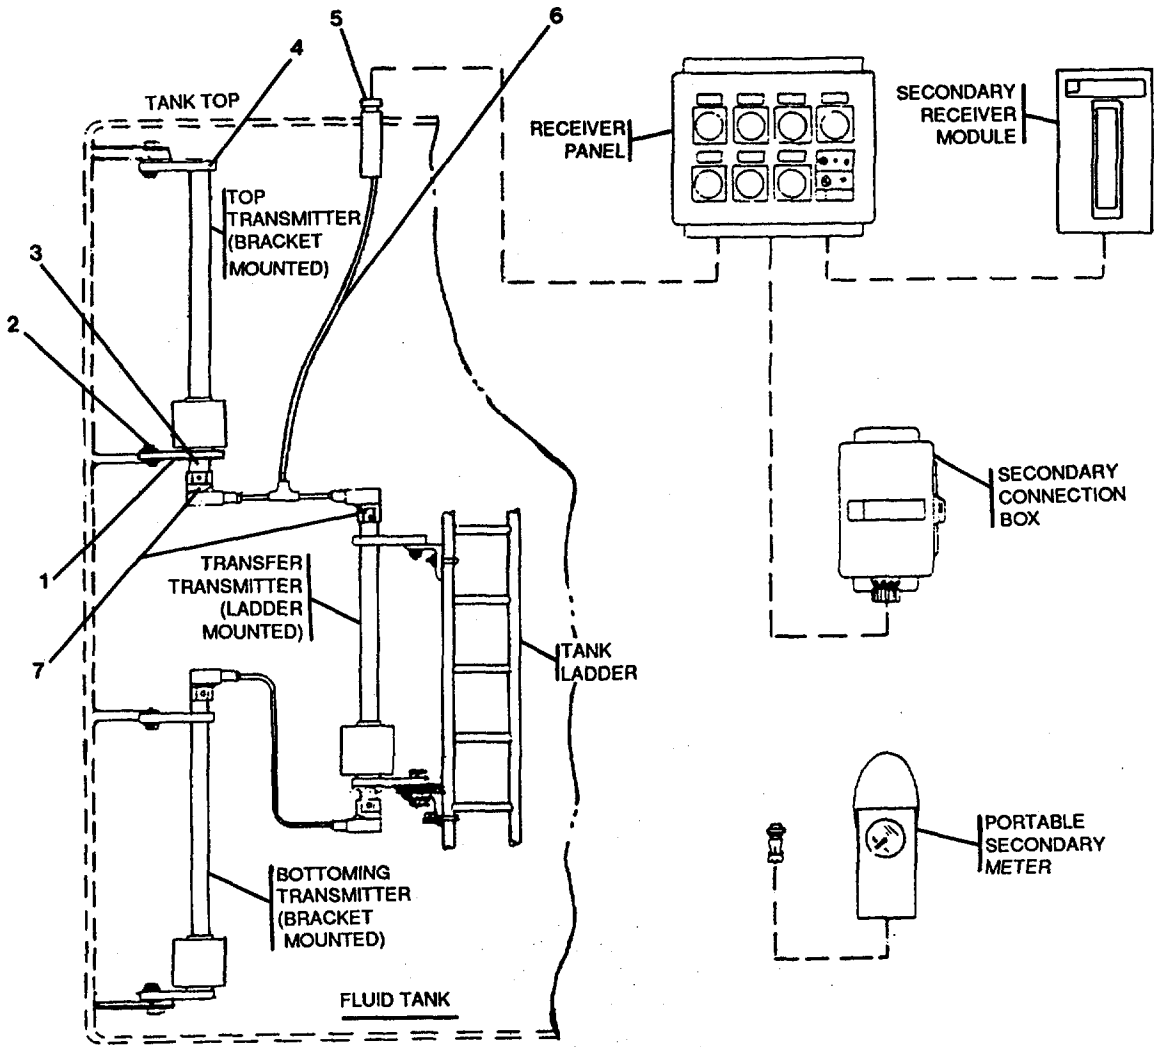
Multi-Transmitter Assembly (Sheet 1 of 2).
